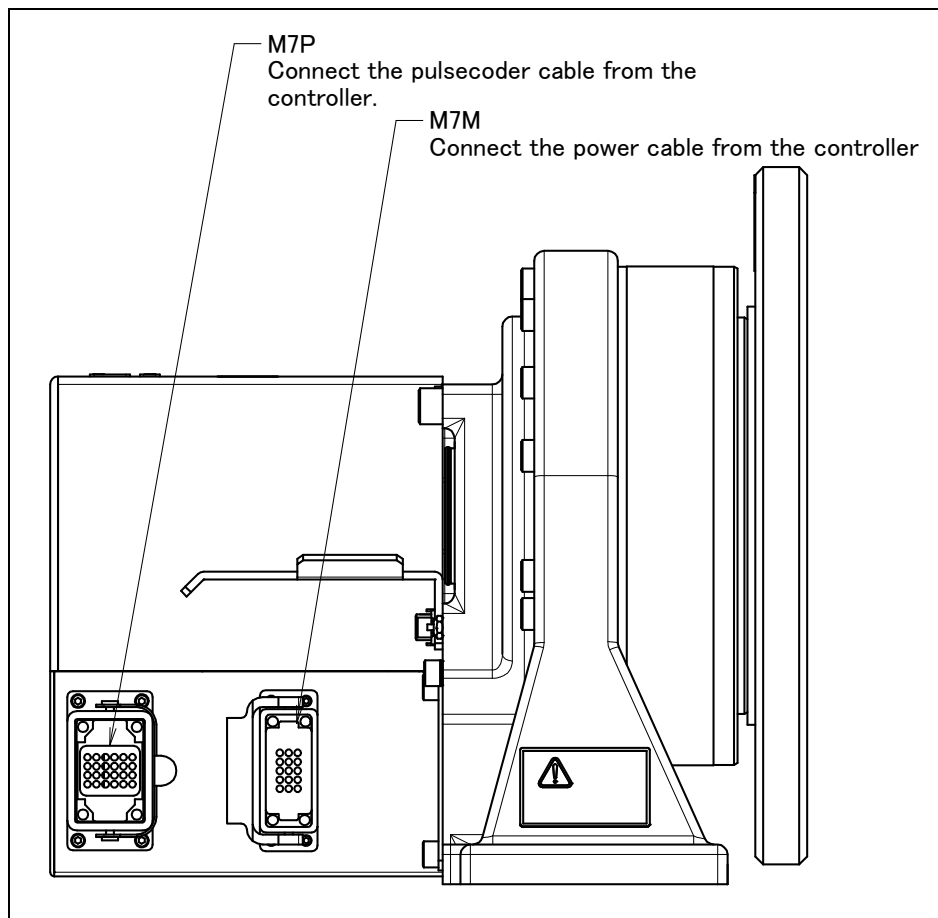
Cable connection panel for the positioner mechanical unit
